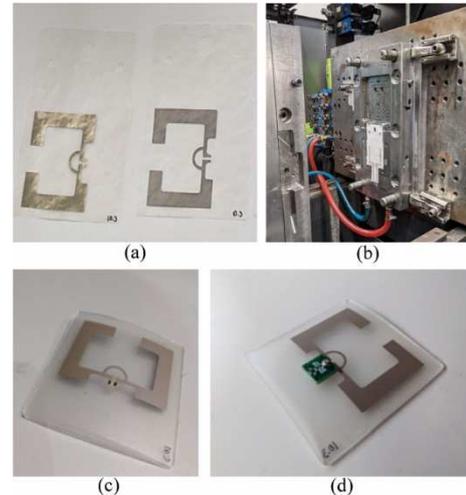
(a) UHF antennas printed on NCF; (b) Injection moulding set-up; (c) View from the backside of TPU over-moulded UHF antenna printed on NCF with exposed connection pads and (d) with hybridized PCB with U.FL connector.
